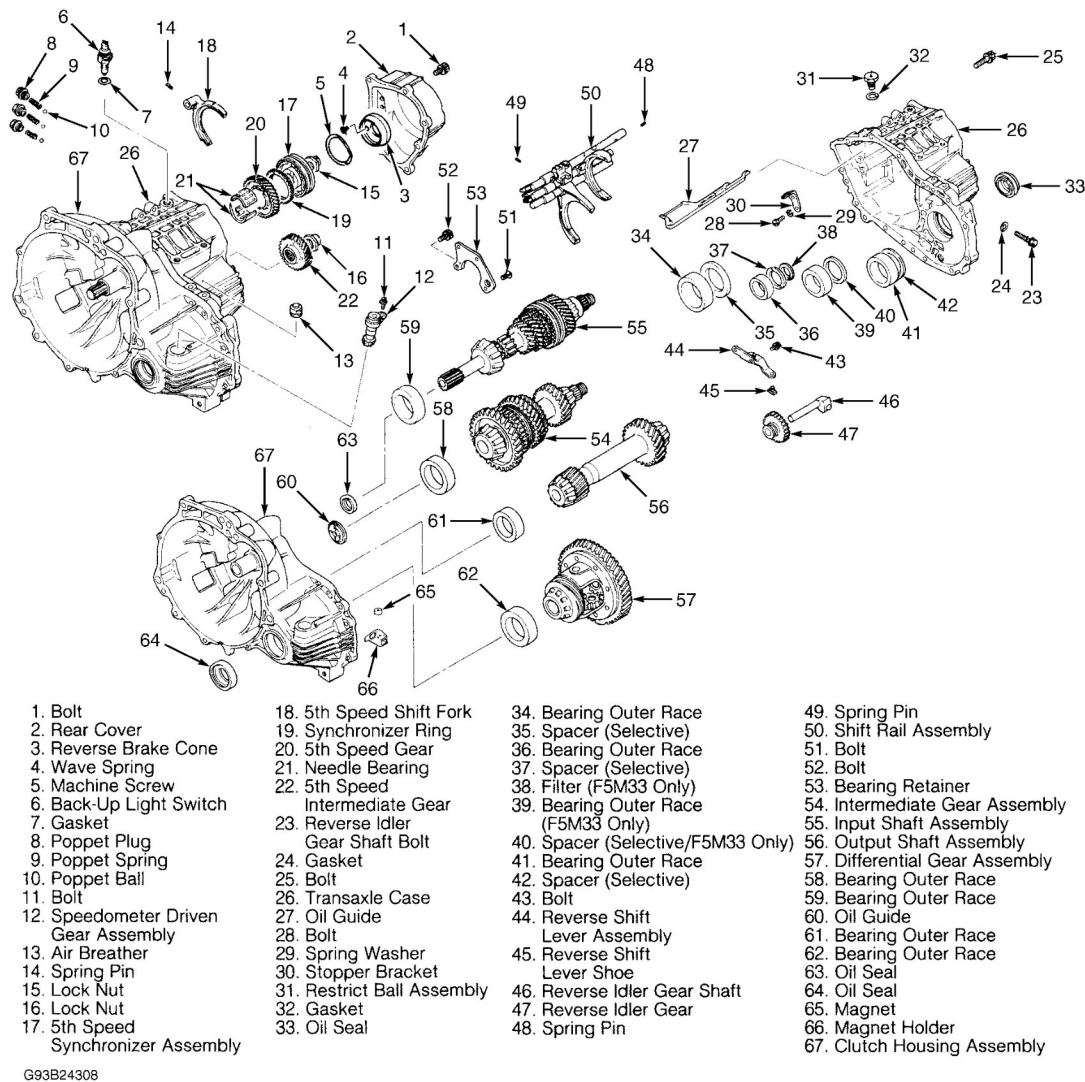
Exploded View Of Transaxle (F5M22, F5M31 & F5M33)
